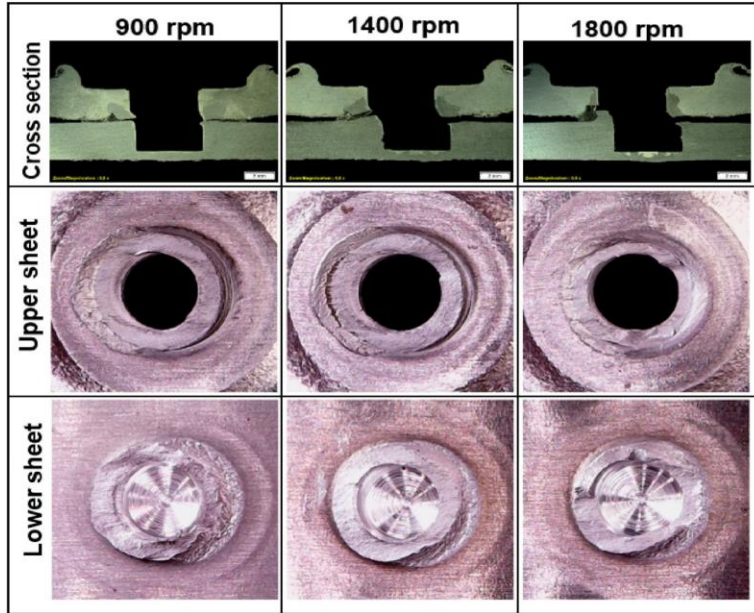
Fracture surfaces of the welds produced using cylindrical pin after lap shear testing.
